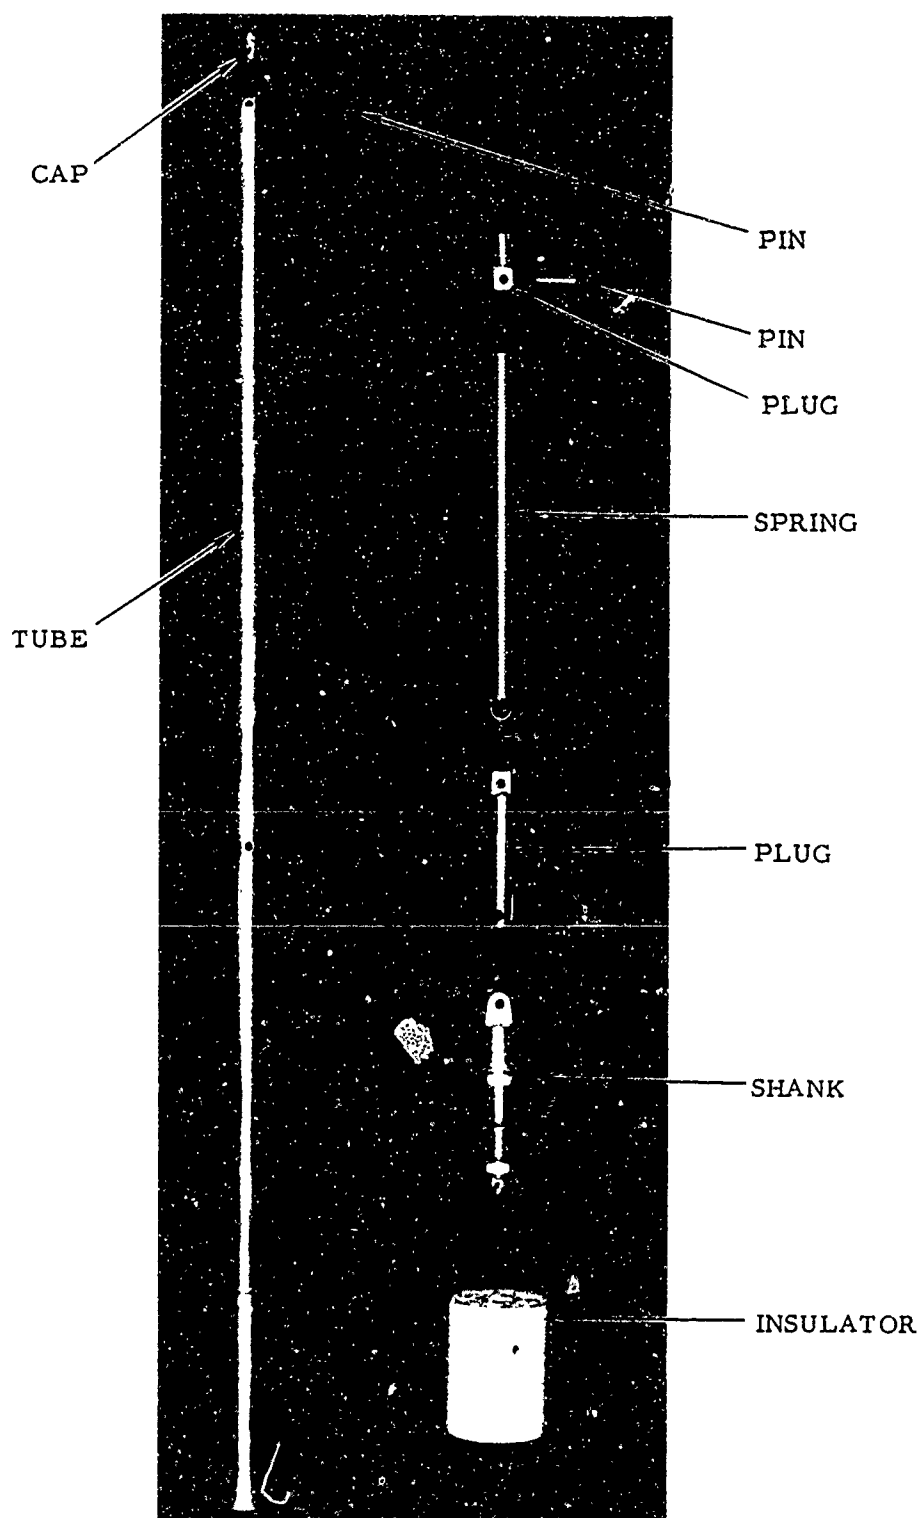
Typical Disassembled 224.5 MC Antenna
